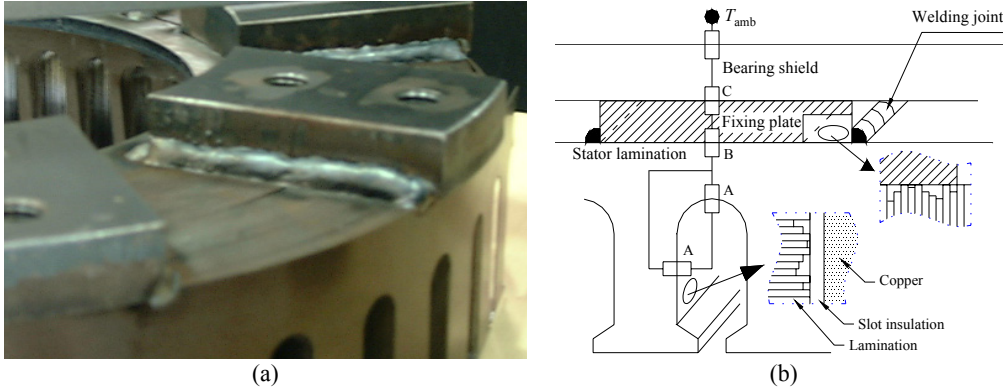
(a) Steel plates used to fix the stator to the bearing shield. (b) Schematic presentation of heat transfer path from the winding to the bearing shield.
